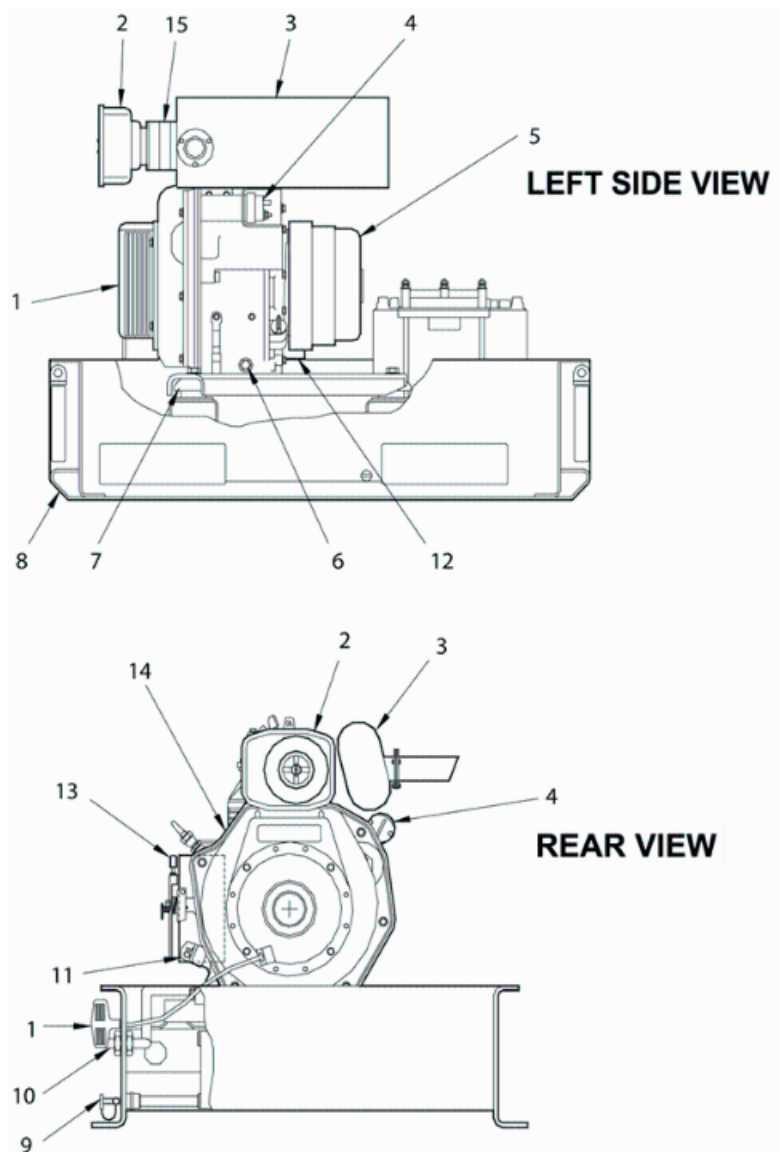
Diesel Engine/Generator Assembly (Sheet 1 of 2).
